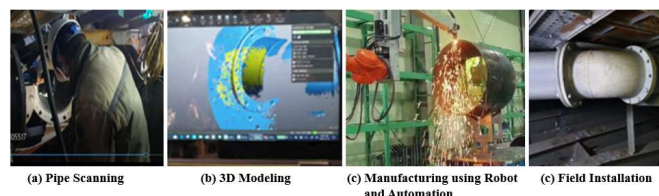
Manufacturing of Adjustment Pipe using 3D Scan and Cutting Robot
